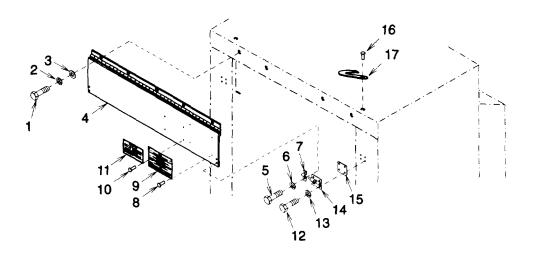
Control Panel Cover, Barrel Bolts, and Door Holder Clips.
